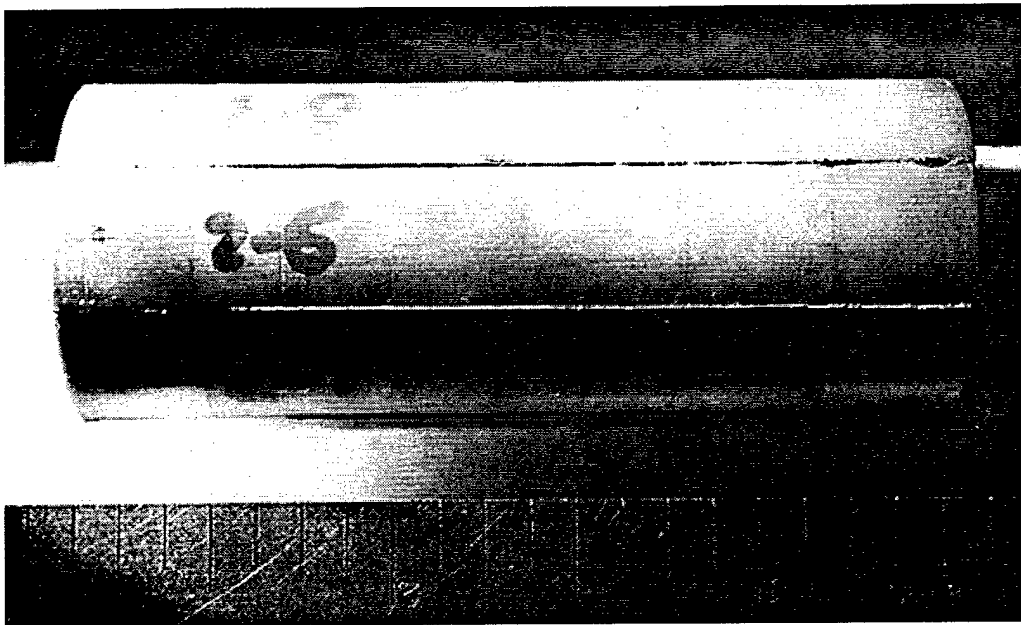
Assembled torsional actuator tube using PZT 5A segments.
